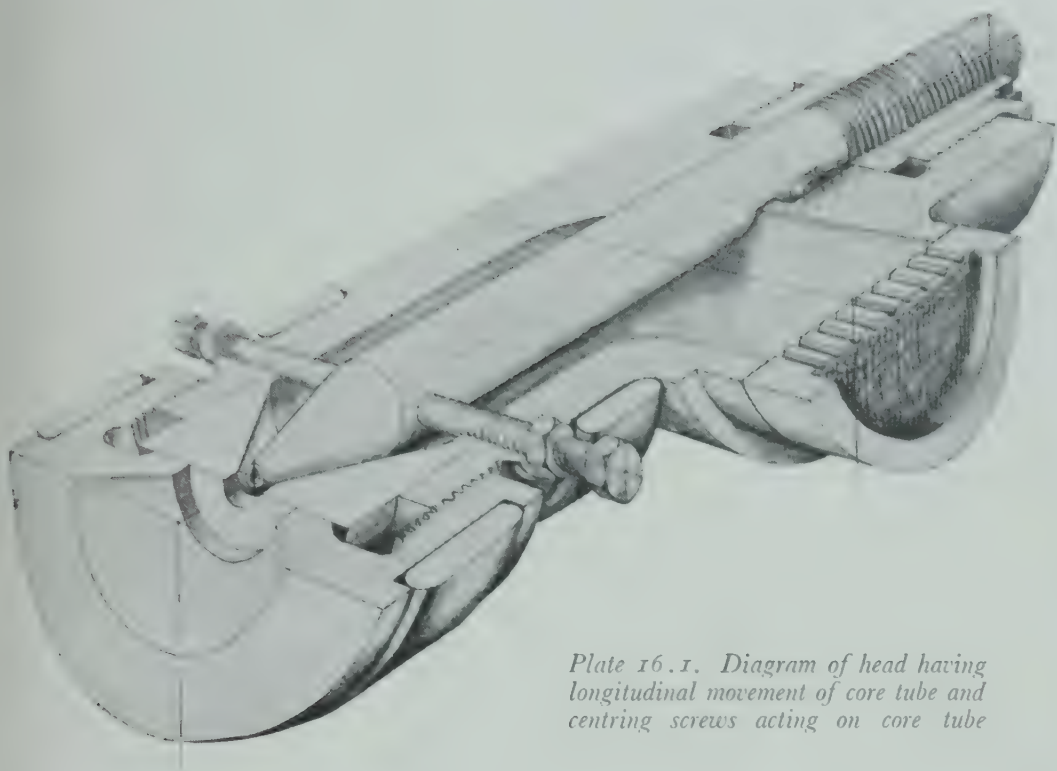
Diagram of head having longitudinal movement of core tube and centring screws acting on core tube
